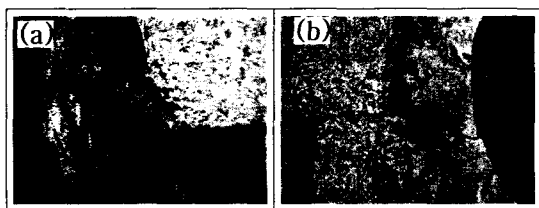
The shapes of A3003 weldment by pulsed Nd:YAG Laser
